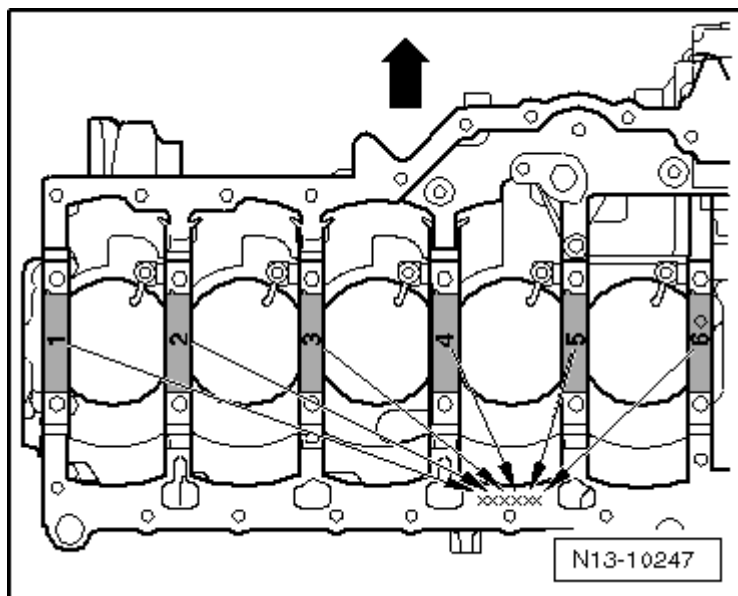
Identification Of Top Crankshaft Bearing Shells
